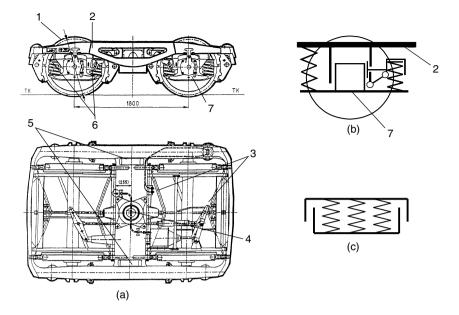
The Y25 bogie: (a) general view; (b) primary suspension scheme (Lenoir damper); (c) elastic side bearing scheme (1, wheelset; 2, rigid H-shaped frame; 3, braking leverage; 4, centre bowl; 5, side bearings; 6, spring set; 7, axlebox).
